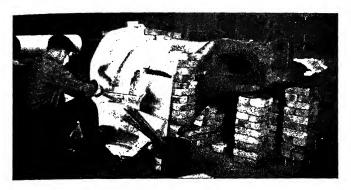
Welding a punch press casting in a preheating furnace.
